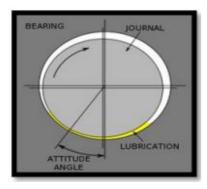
A journal bearing under a hydrodynamic lubrication state showing how the journal centerline shifts from the bearing centerline
